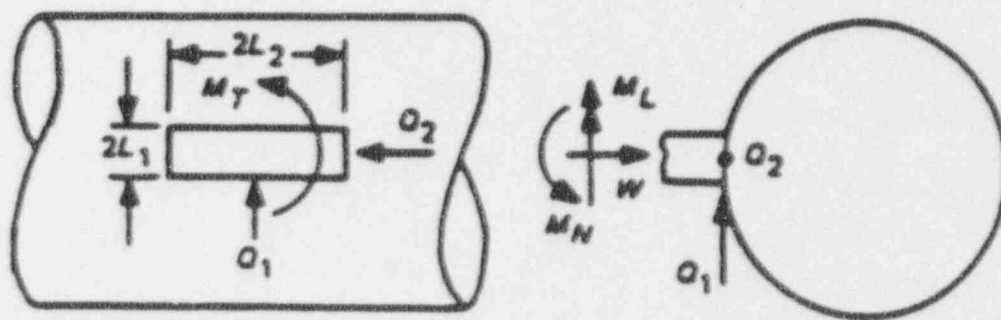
Rectangular Weld Attachment Load Components
